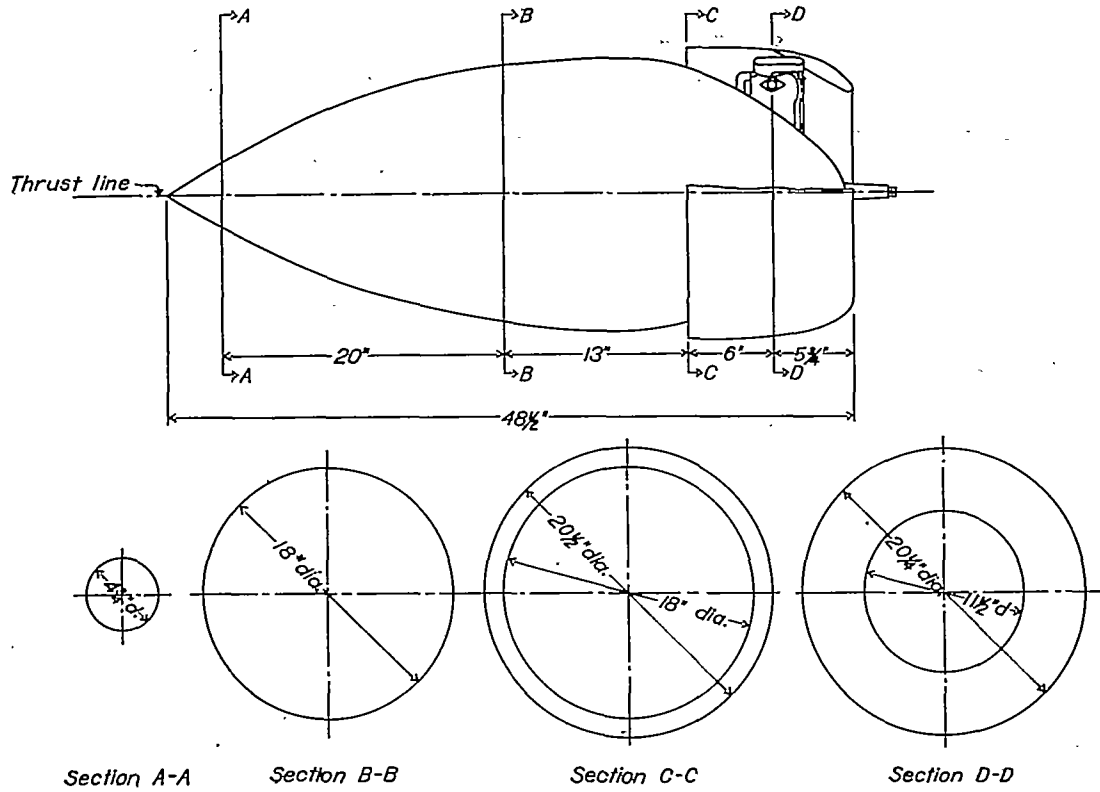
Nacelle, engine, and N. A. C. A. cowling assembly
